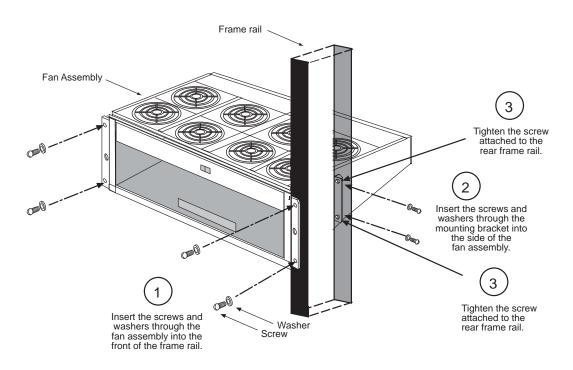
Insert Fan Assembly Below EOAP Shelf
